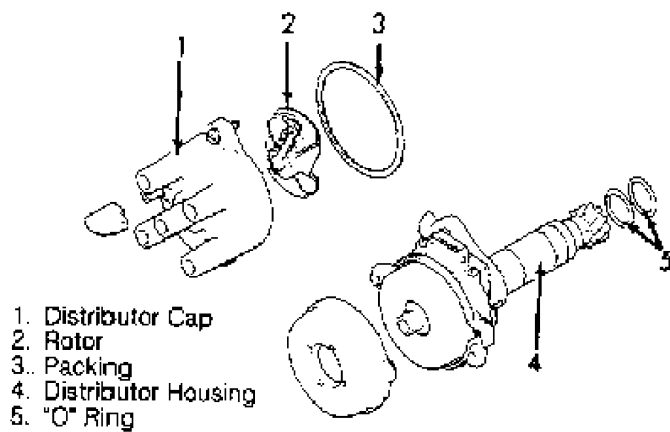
Exploded View of Distributor (Galant 2.0L SOHC)
